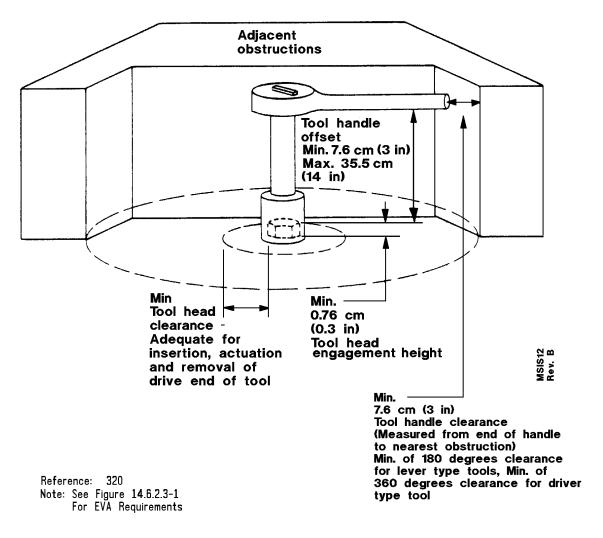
Tool Access Requirements (IVA)
